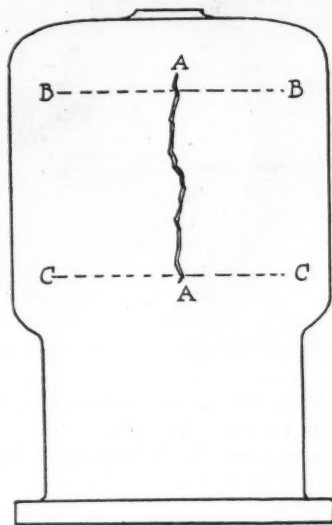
Cylinder block in which crack AA is to be welded
